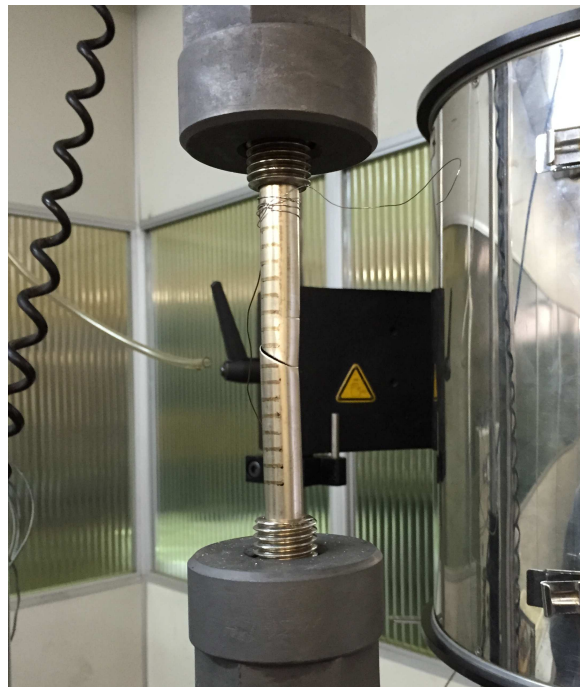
Design of the hot tensile test of the tubes, showing the helical mode of fracture.
